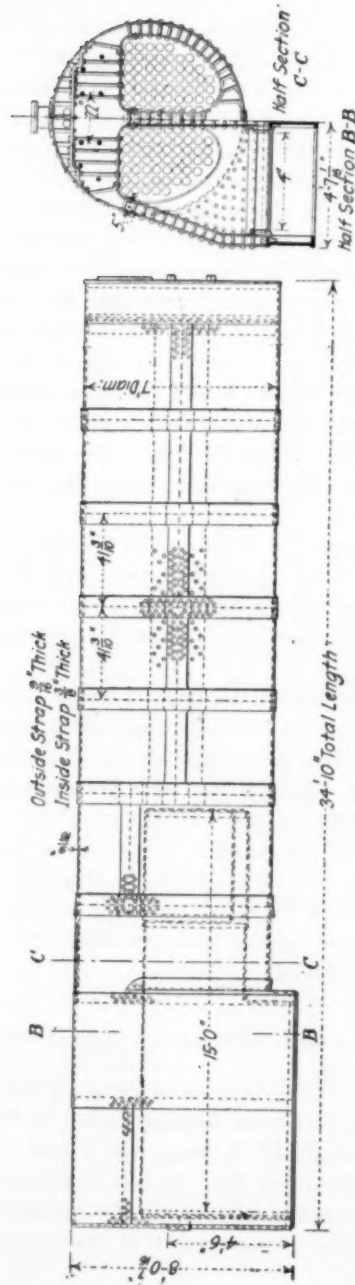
LOCOMOTIVE TYPE BOILER OF 1879
